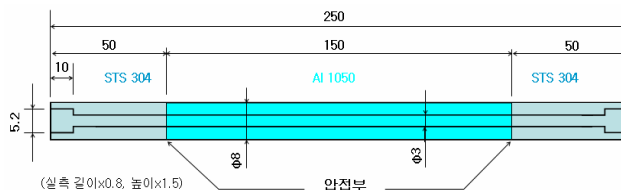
Drawing of a STS304-Al-STS304 friction welded tube for HANARO irradiation capsule.
